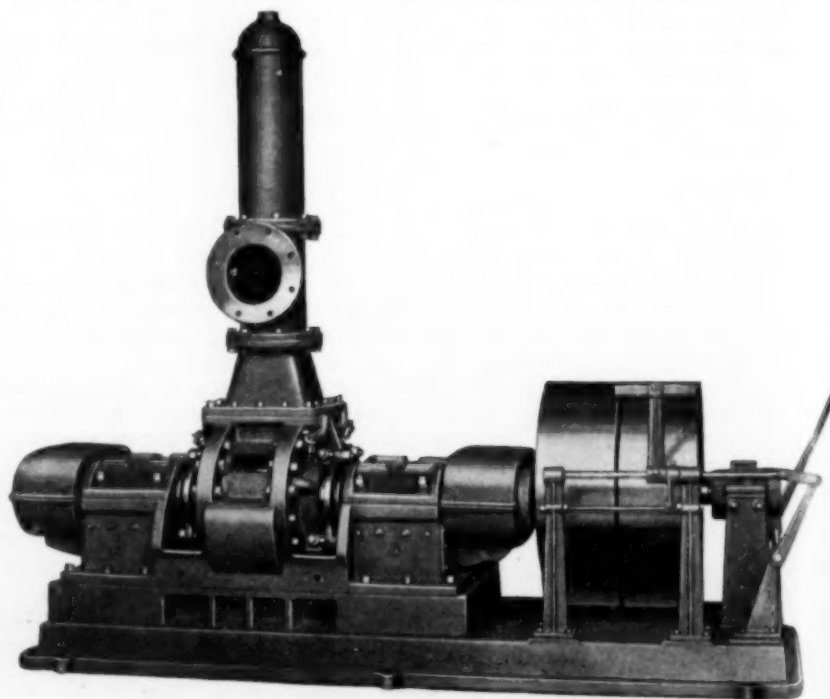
VIEW OF ASSEMBLED PUMP AND DRIVE
